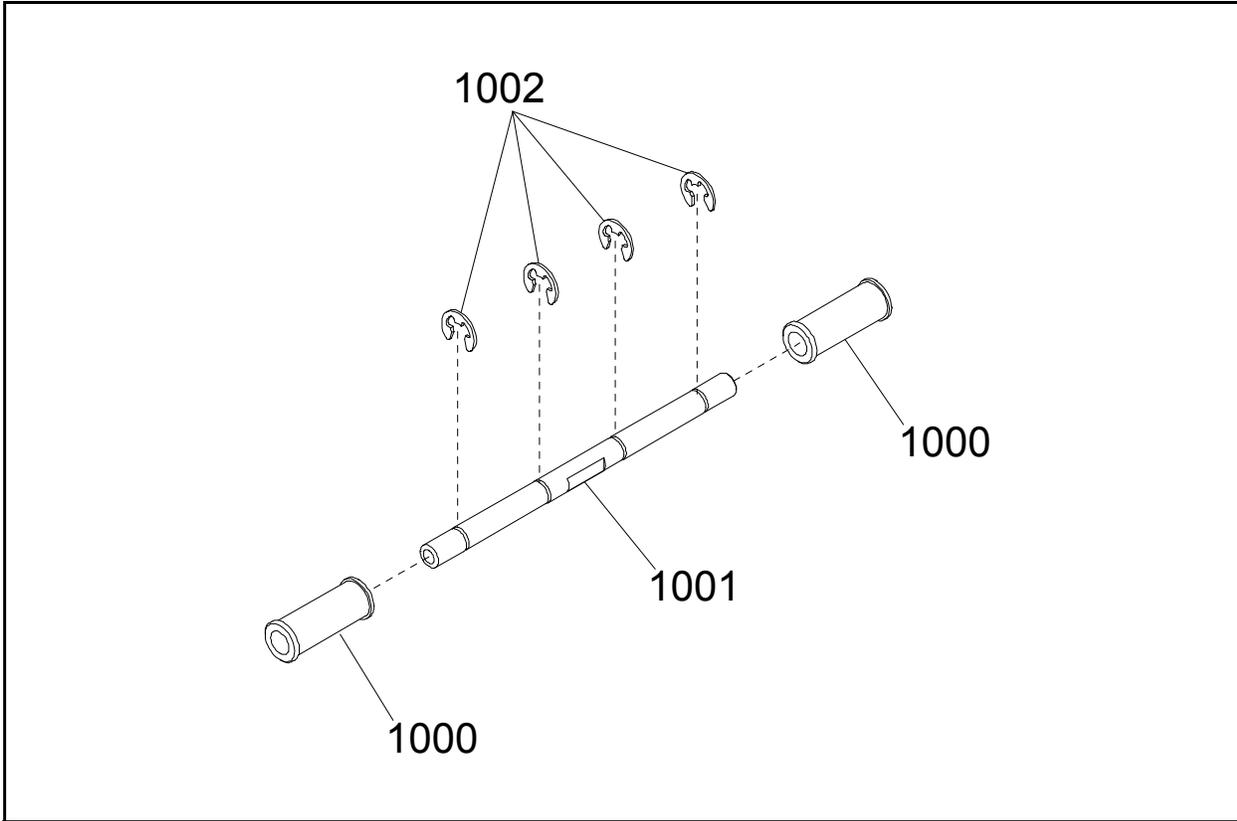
VEGA-RC Twin Guide Roller Assembly Exploded View
